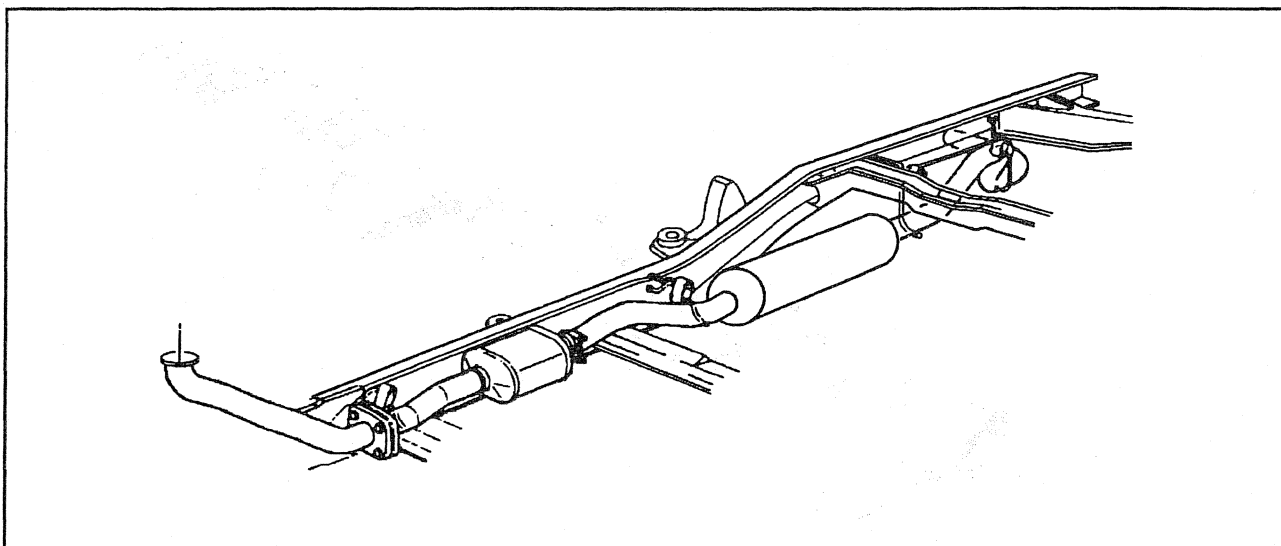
Exhaust System - C/K 1, 2 -Extended Cab w/L56 & Short Box
